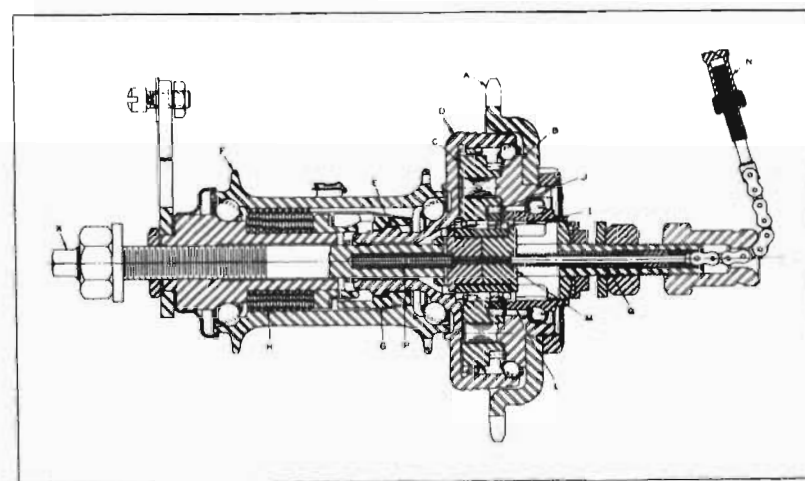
Cross-section view of "Tripspeed" coaster-brake mechanism.
